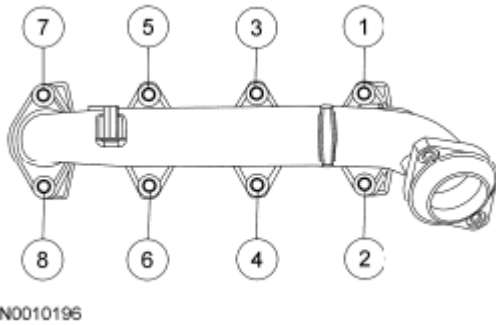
Identifying LH Exhaust Manifold Nuts Tightening Sequence
